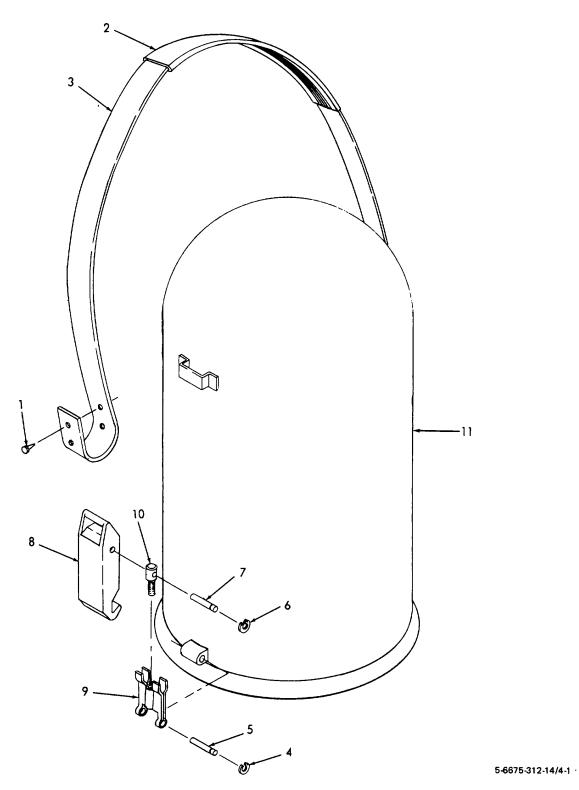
Metal carrying case metal hood, disassembly and assembly.
